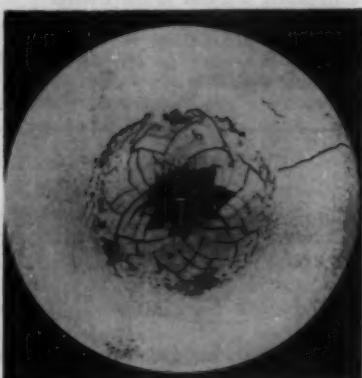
Cross-section of 24S-T aluminum alloy hollow cylinder loaded in manner illustrated in Figure 1(c). (3/4 in. I.D., 1-in. wall, 1/8 in. explosive.)
